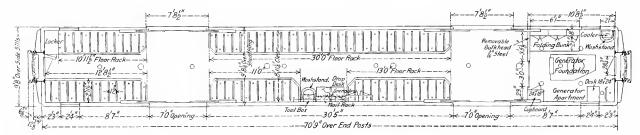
Floor Plan of Baltimore & Ohio Steel Baggage Car Shown in Fig. 126.
